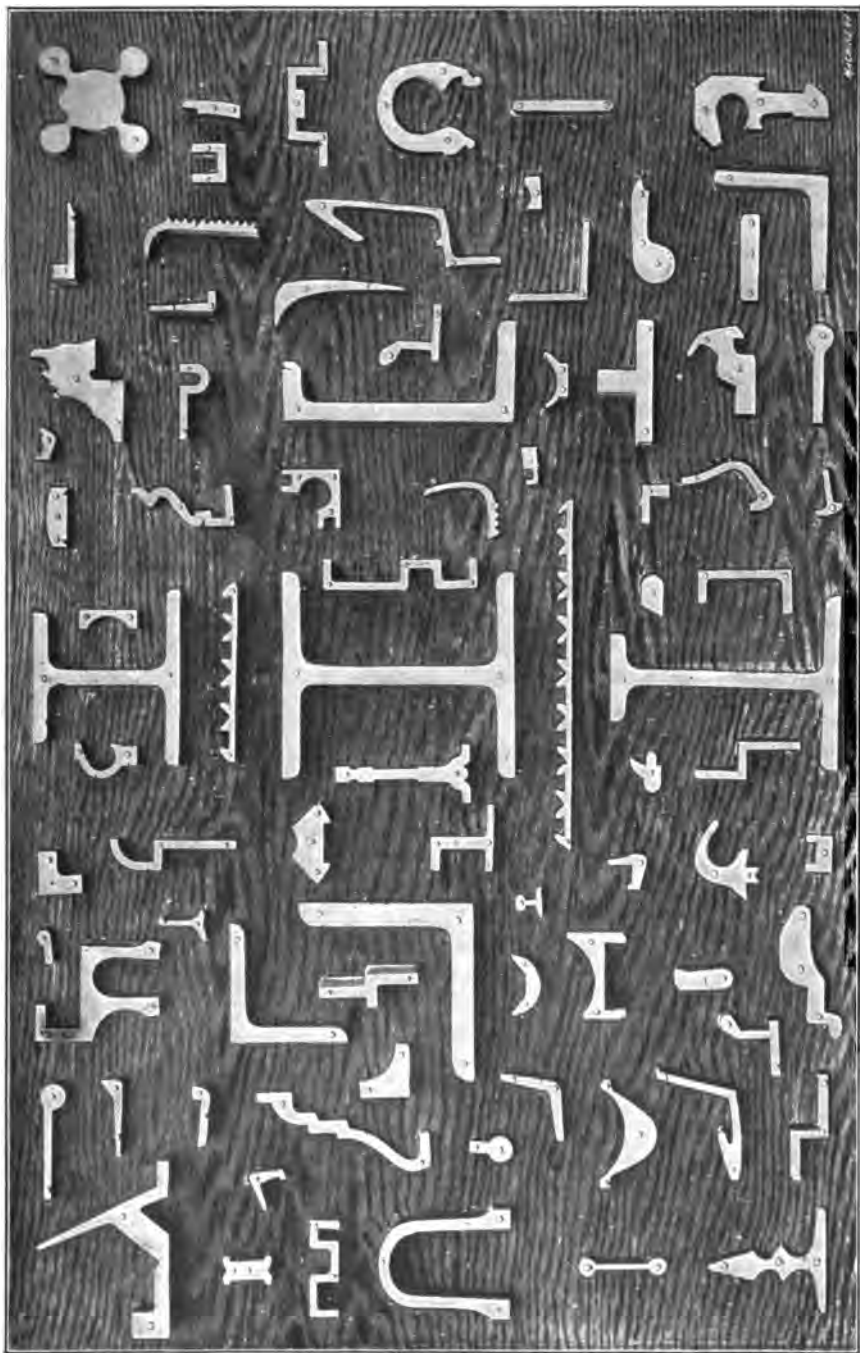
Examples of Extruded Metal Shapes produced by the Coo Brass Mfg. Co.
